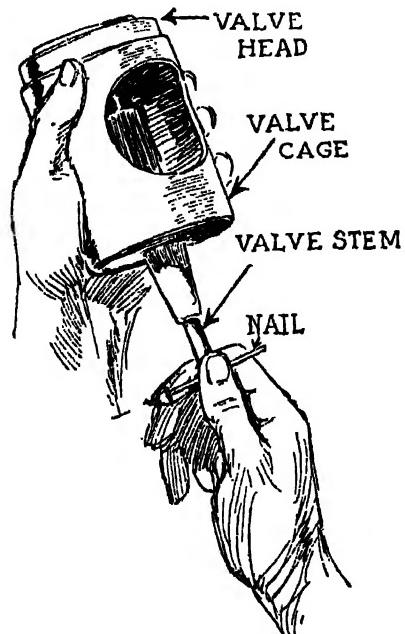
A Nail or Piece of Wire Only Tool Necessary for Grinding Buick Valves to Correct Seating in Cage.
